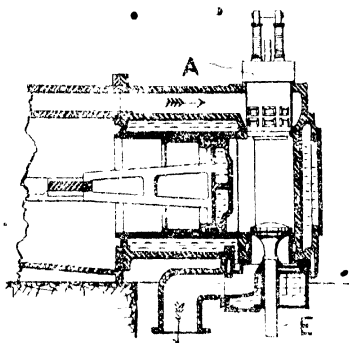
Sectional view of Premier gas engine, showing arrangement of admission and exhaust valves.
